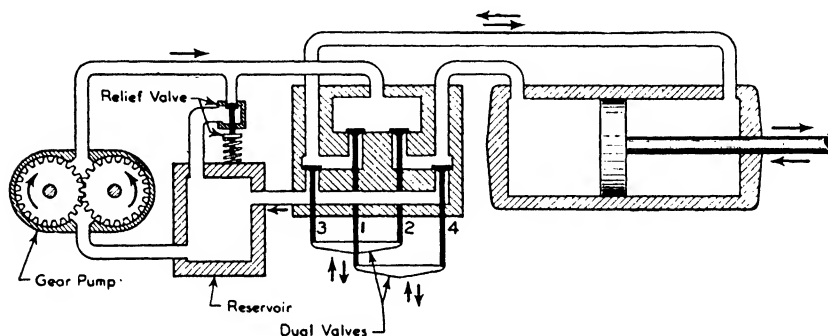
Hydraulic Mechanism with Source of Regulated Pressure and Four-way Valve.
